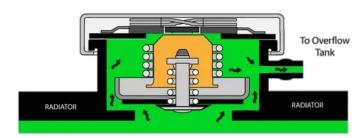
Radiator pressure cap (coolant expansion stage)
